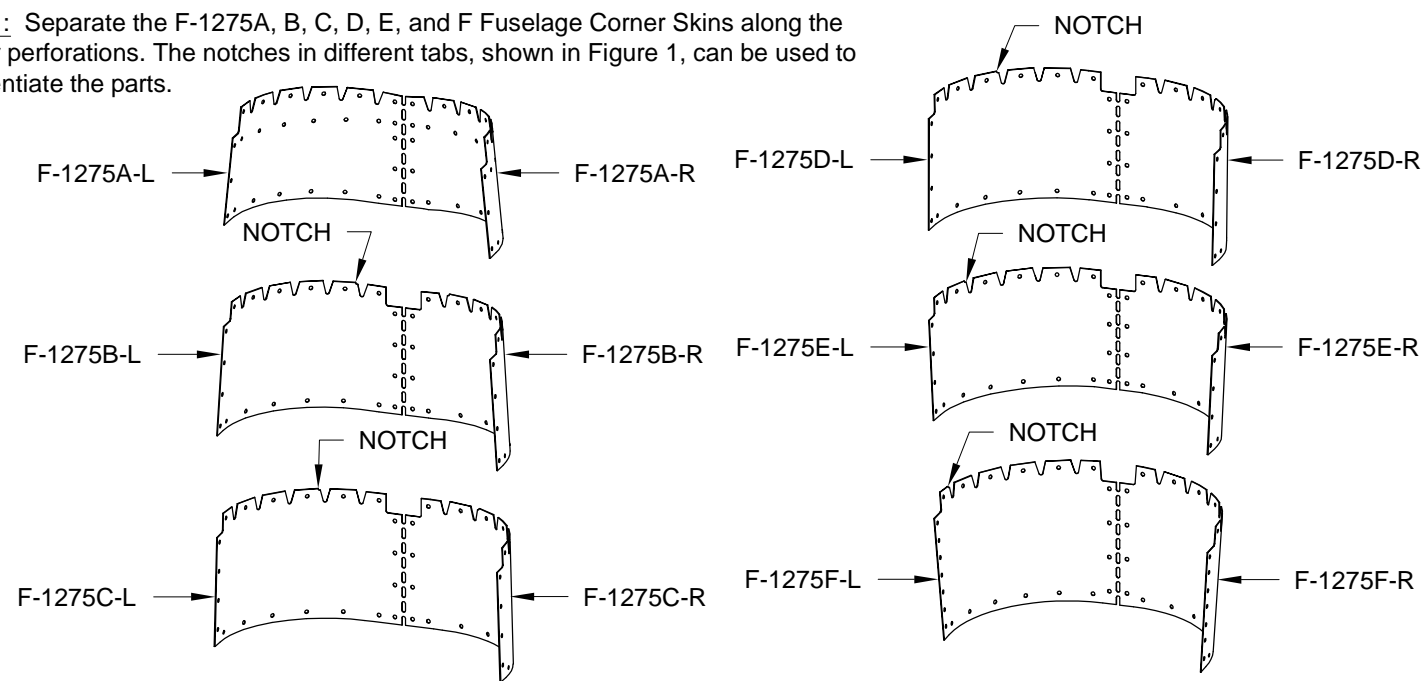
SEPARATING THE F-1275 FUSELAGE CORNER SKINS
